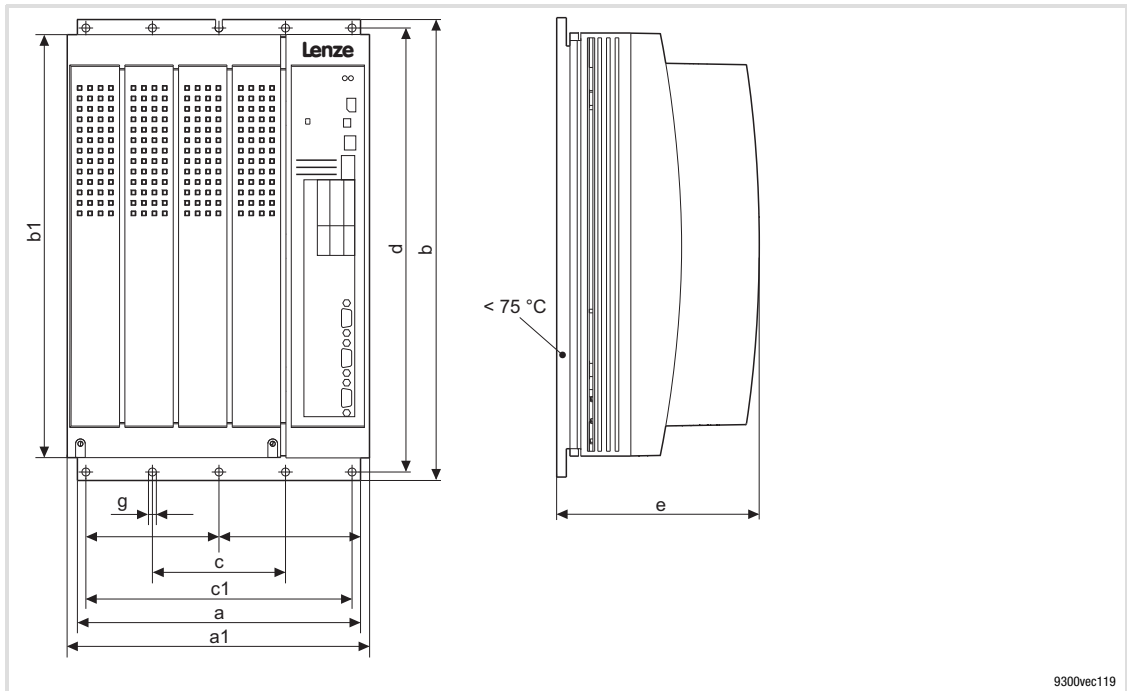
Dimensions for mounting in "cold plate" technique 15 ... 22 kW
